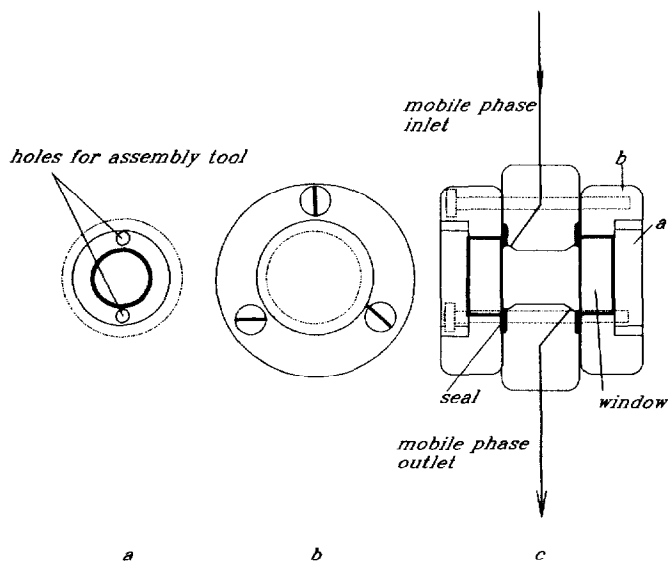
Design of the UV detector cell. (a) Screw; (b) cover (front view); (c) cell assembly.
